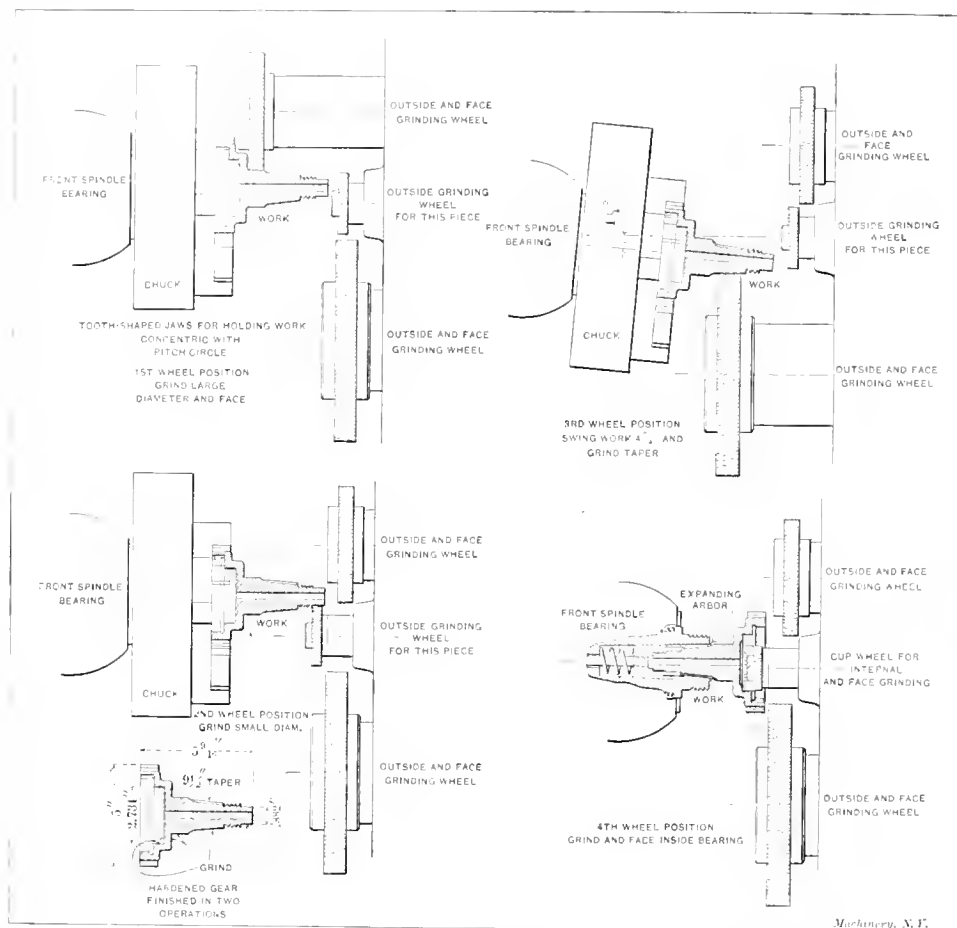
Method of Finishing a Piece requiring Two Settings, and having Cylindrical, Face and Taper Surfaces to be ground
